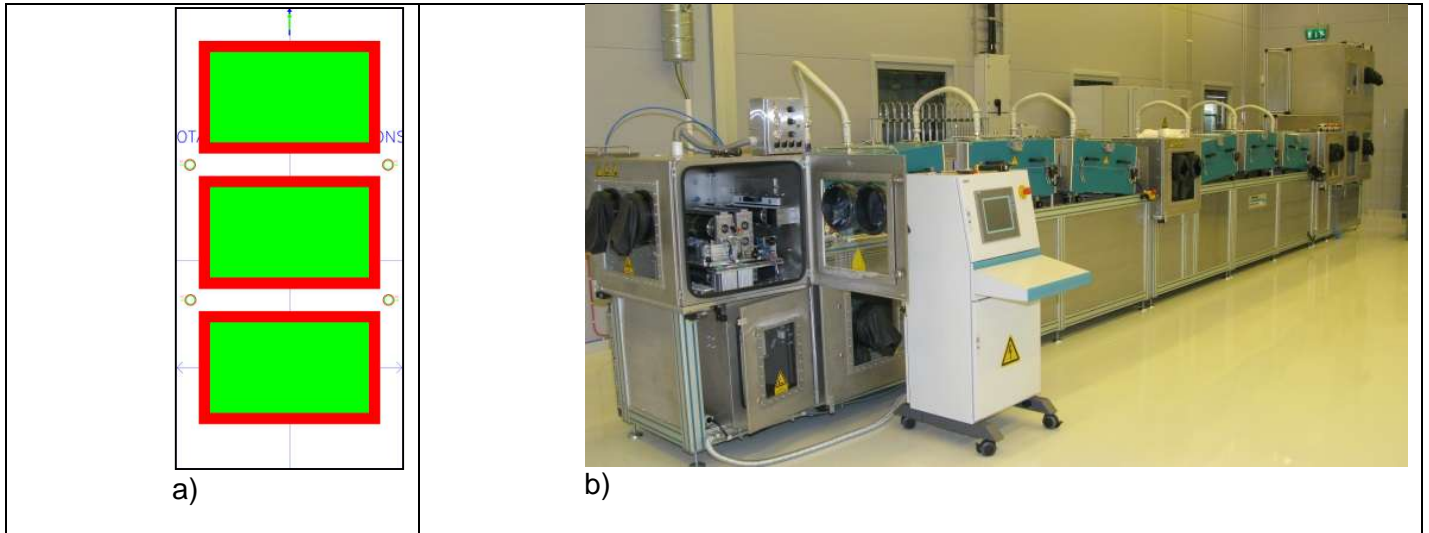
The fourth trial: a) layout, b) NICO printing machine used in additional IR drying.
